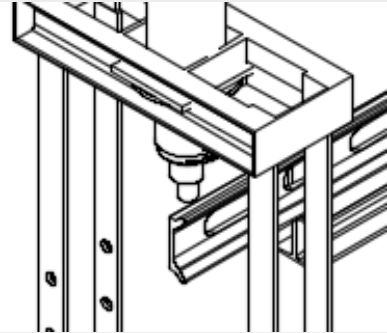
Isometric View VR30 Part, anchor, and force Block
